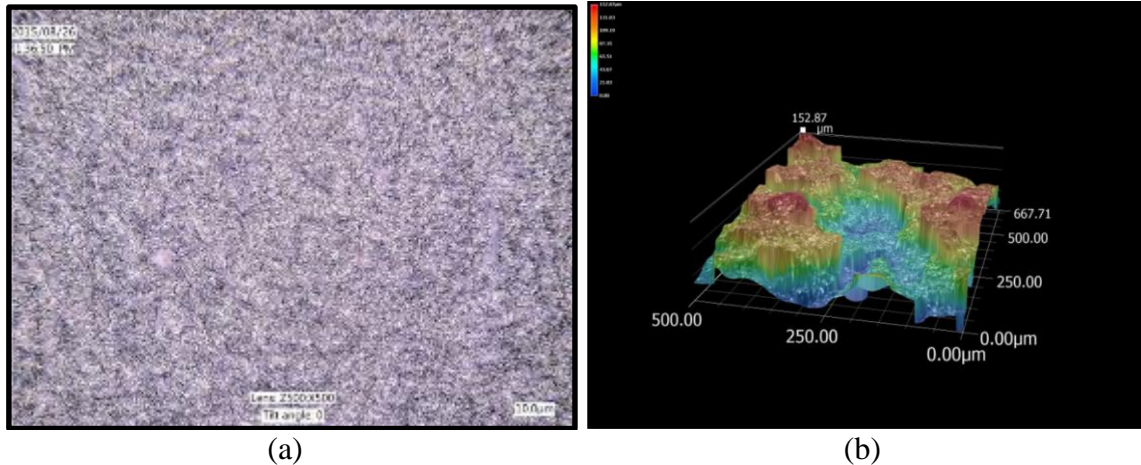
Image of Initial H13 Fracture Surface (a) w/ 3D Map of Surface Height (b)
